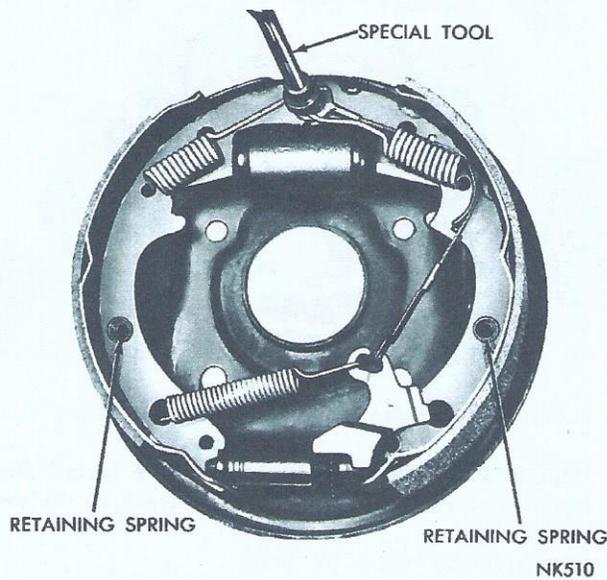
Removing or Installing the Brake Shoe Return Springs (front)
